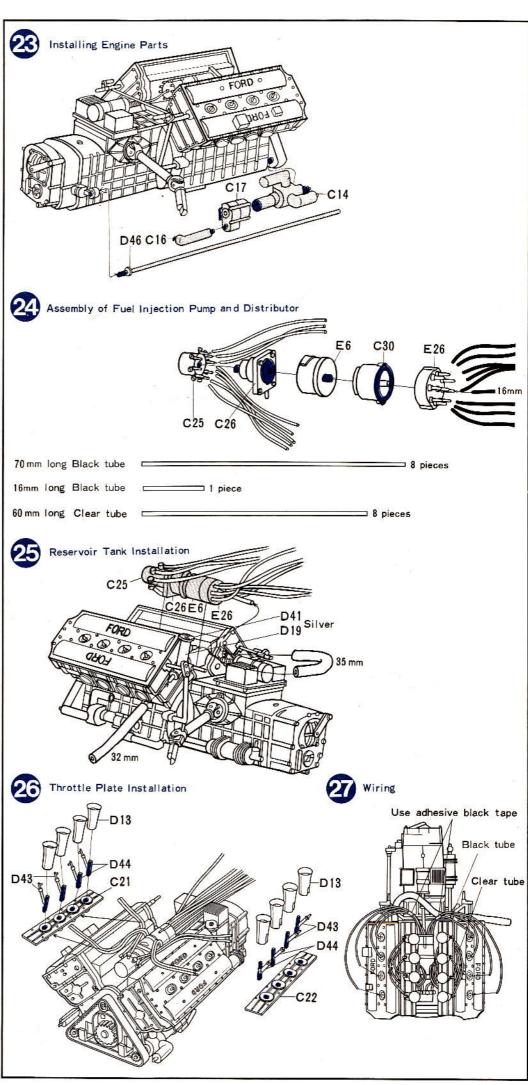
Throttle Plate Installation Cement the throttle plates C 21 and 22 to the engine by aligning the clear tubes positioned as illustrated. Cement D 43 and D 44 to C 21 and C 22 as shown. Then cement the air intake D 13.
